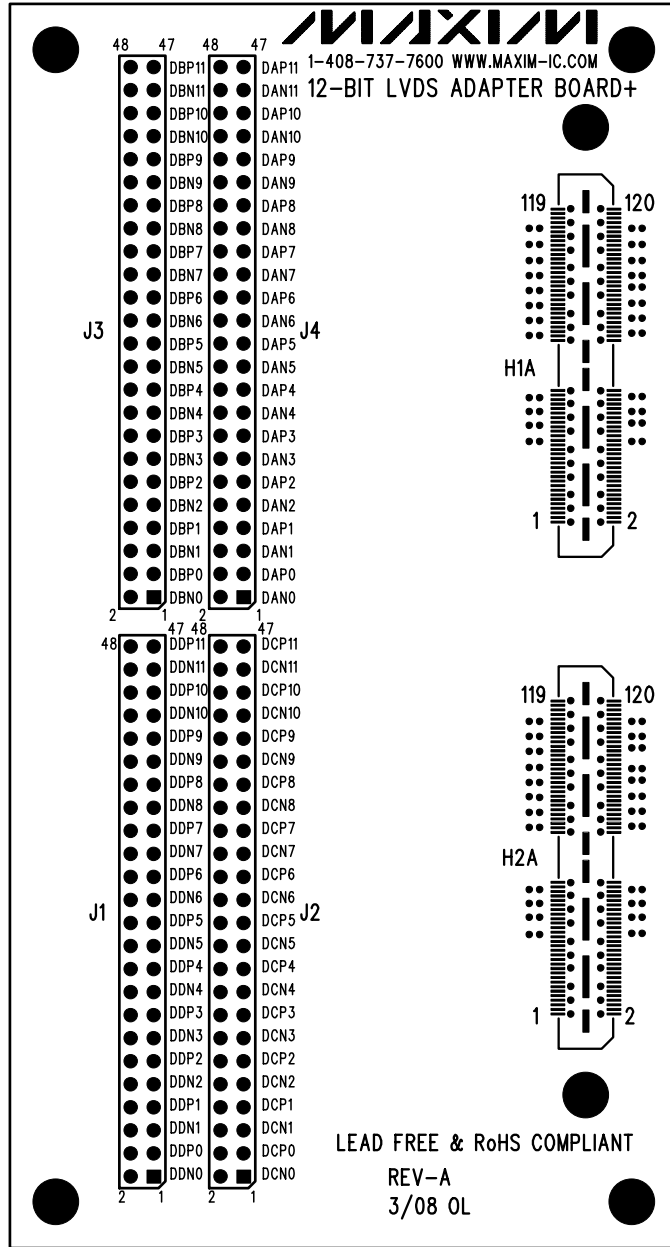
12-Bit LVDS Adapter Board Component Placement Guide—Component Side
